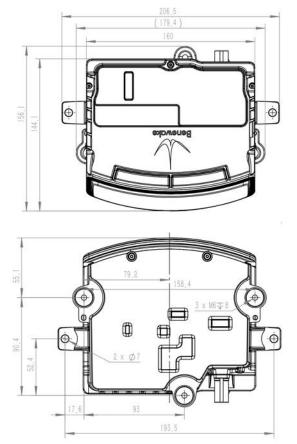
Top view (left) & bottom view (right) of the sensor (unit: mm)
